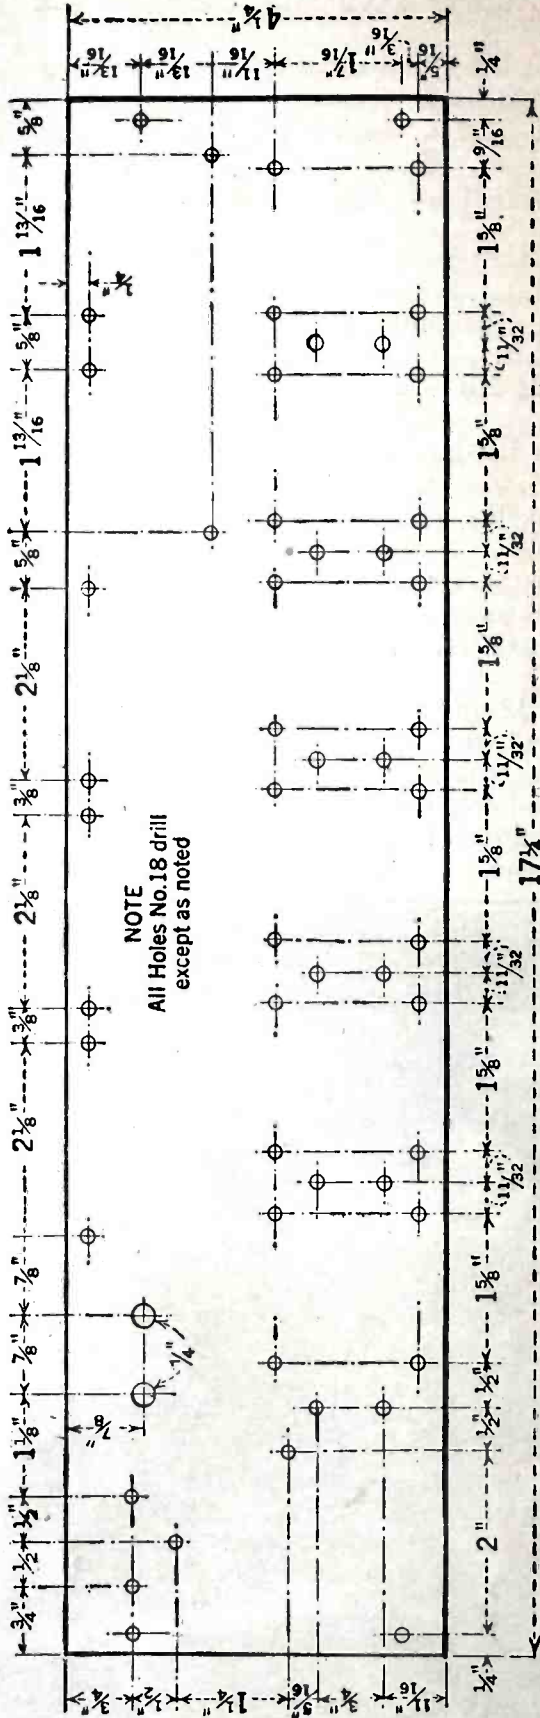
Layout for drilling the sub-panel. All dimensions for spacing holes are clearly given. However, these dimensions apply only to the use of the particular parts specified. When drilling this sub-panel great care must be taken to drill each hole accurately as trouble may arise in mounting the parts. It is a good plan to start the holes with a small drill about 1/16 inch in diameter and then enlarge them by re-drilling with the larger size drill. This method will insure accurately centered holes.
